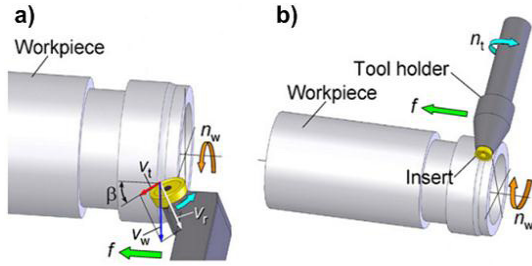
Types of rotary turning tools, a) SPRT and b) ADRT [11].
